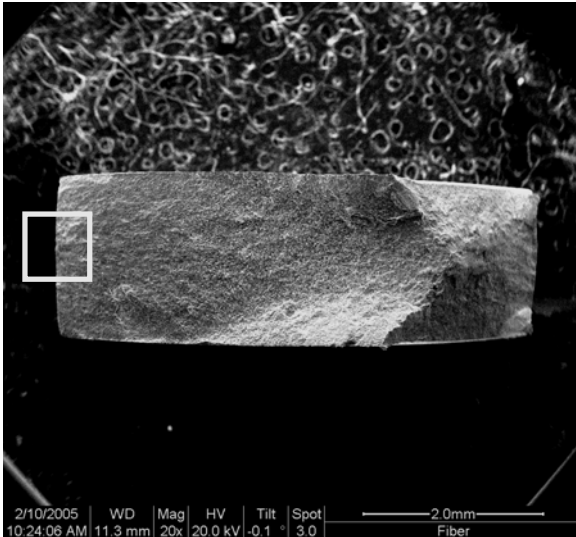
Specimen Ti-01, overall view of fracture surface
